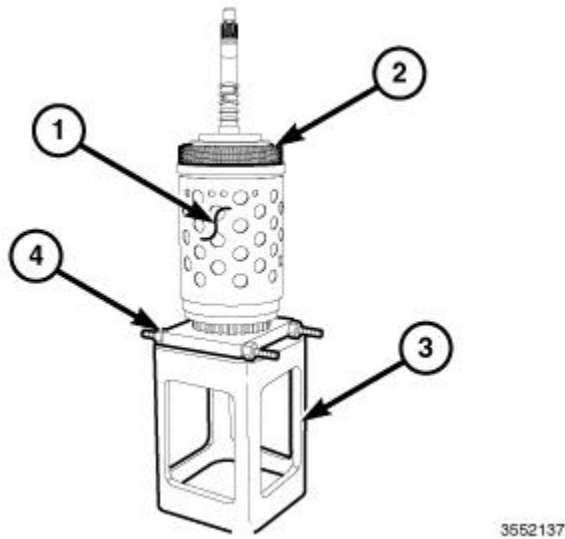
P4 Annulus Drum Assembly, Press Fixture Assembly & Bearing/Gear Splitter
